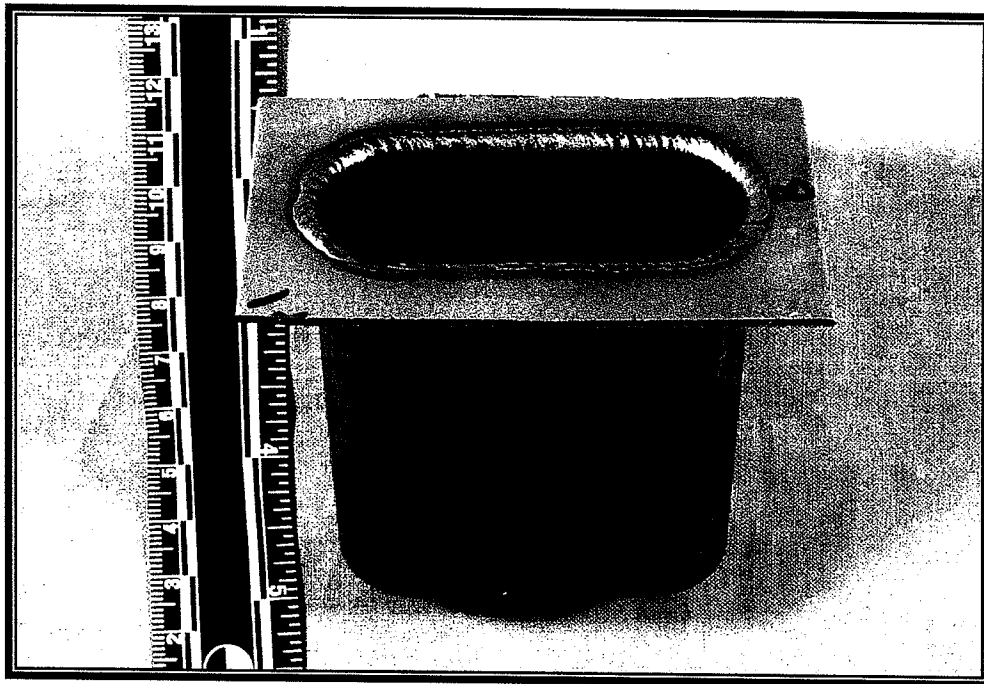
Welding side of the tube-to-sheet joint.
